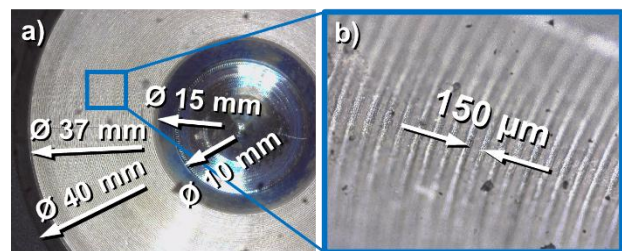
Top view microscope image (a) and inclined detailed view on a section (b) of a surface machined with 1800 $\mu\text{m/s}$, NaCl electrolyte, 360° circular nozzle movements
